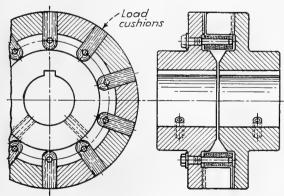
In one design of Lovejoy Tool Works flexible coupling, individual free-floating load cushions are hung between the flange jaws on removable studs. These replaceable cushions are made of brake-lining material, leather or rubber-duck fabric, depending on the loads sustained and the resilience required. No lubrication is needed.
